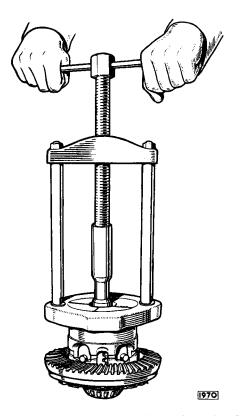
Withdrawing a differential bearing using Churchill Tool No. SL 14 with adaptor No. SL 14-3
